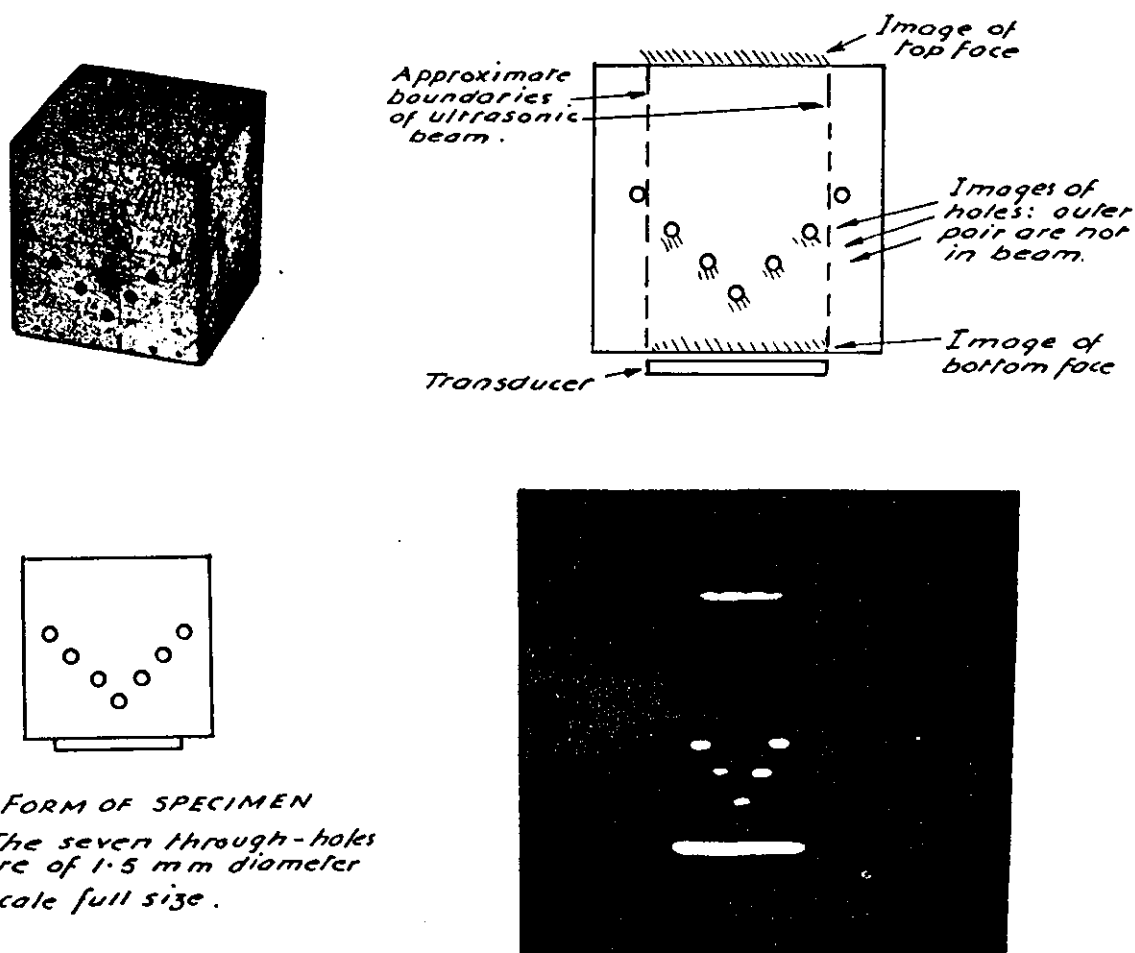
DUVD image of some holes drilled in a steel specimen (after Hanstead)
